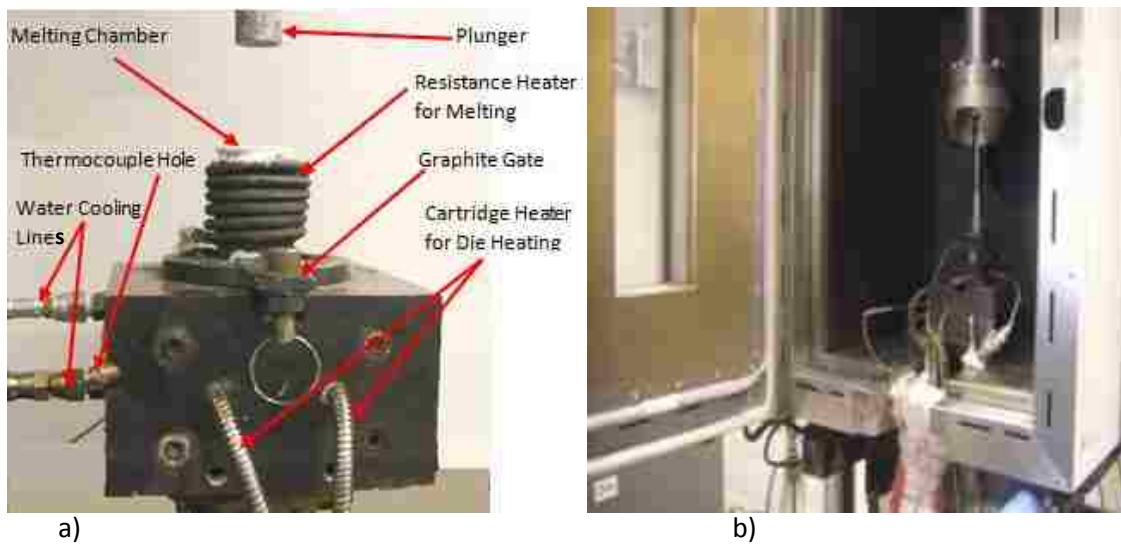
a) Details of die assembly, b) Environmental chamber.
